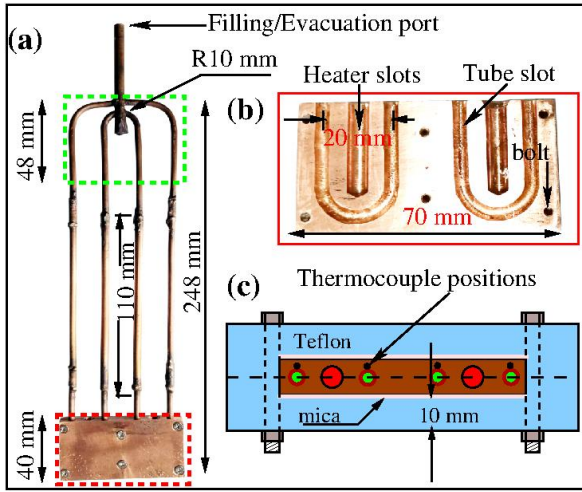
(a) Heat pipe specimen, (b) machined evaporator plate, and (c) schematic of evaporator assembly
